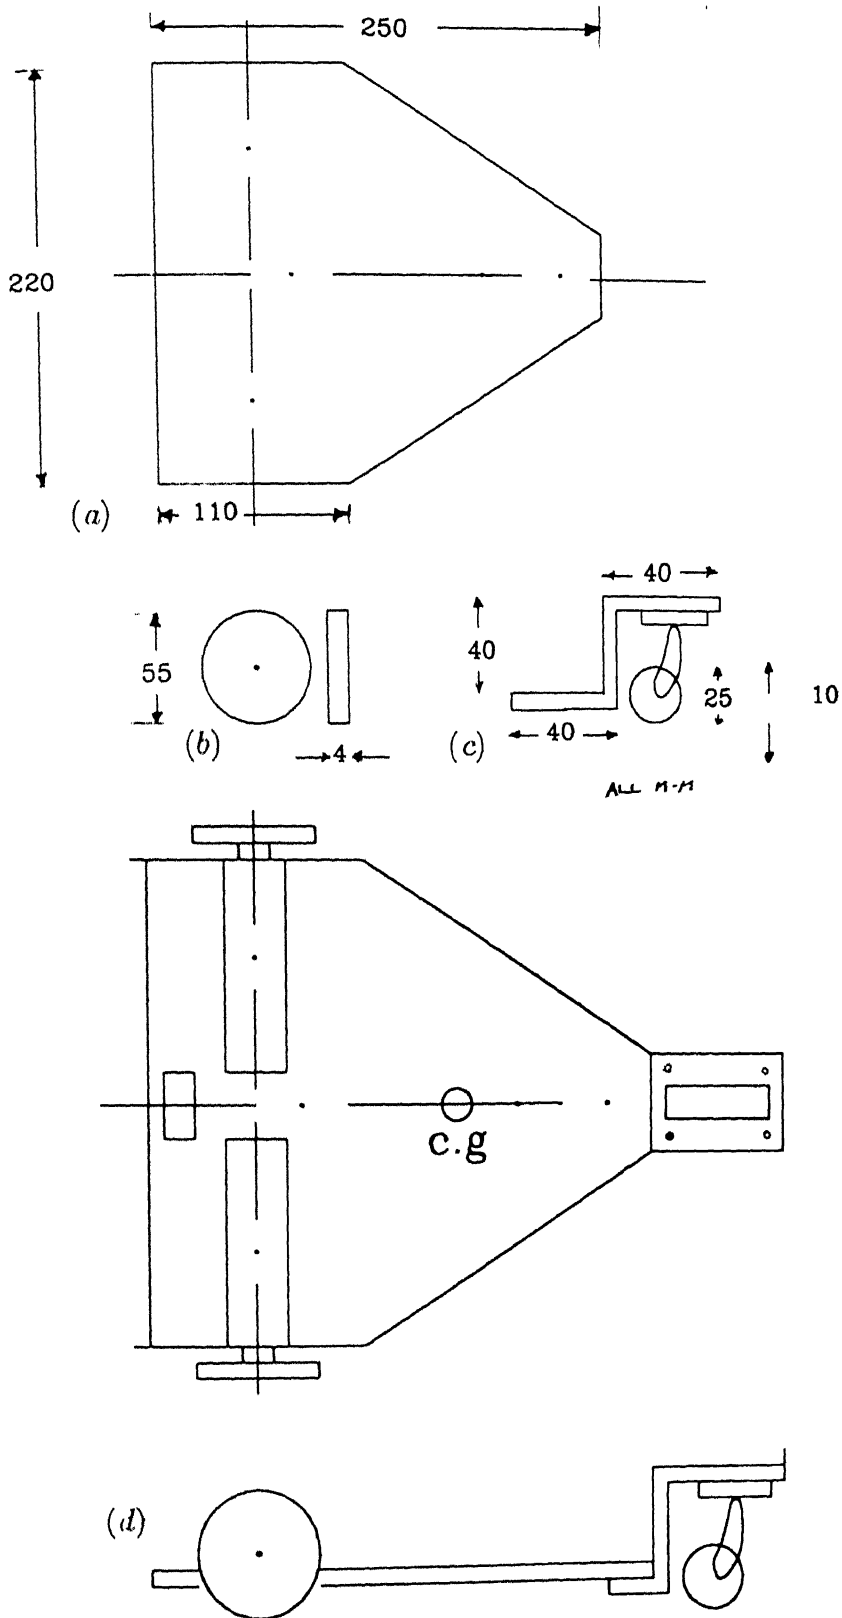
(a) Body plate (b) Wheel (c) Caster (passive wheel) (d) Vehicle assembly
